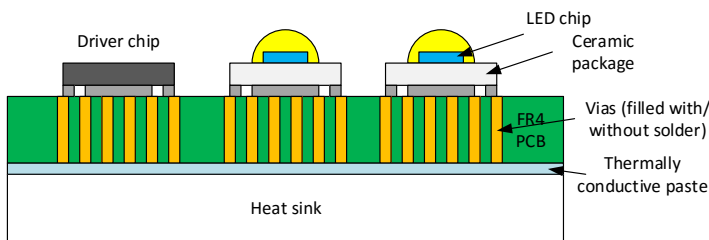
Cross-sectional view of a conventional SSL module: packaged LEDs and ICs are separately mounted on PCB while the whole assembly is connected with a heat sink through TIM.
